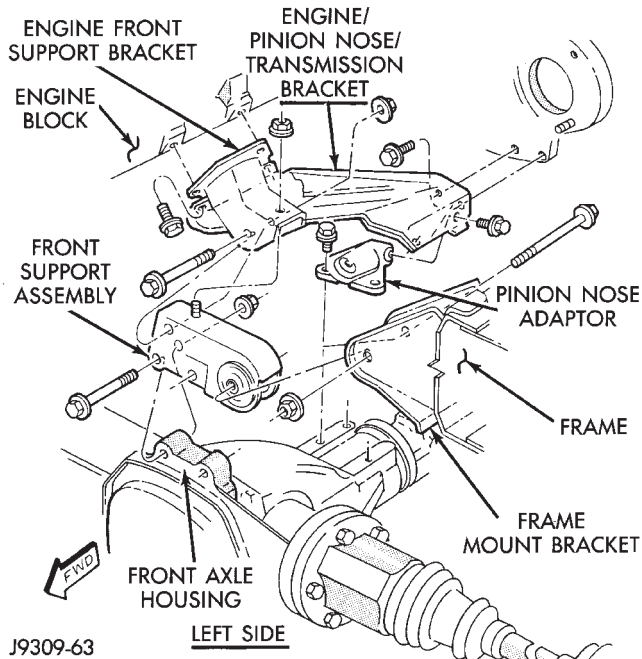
Engine and Axle Front Support—4WD Vehicles
